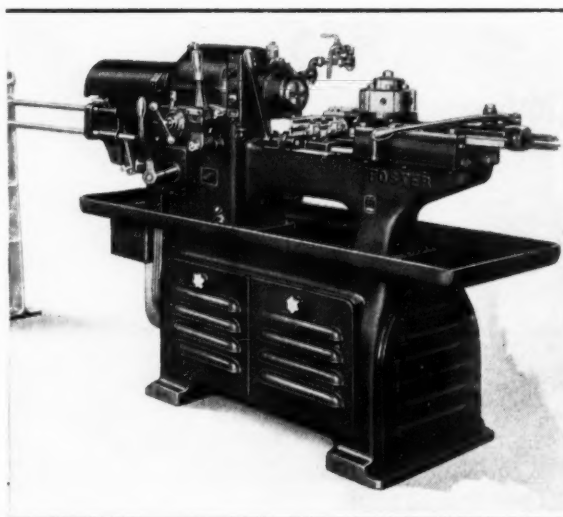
Screw Machine which Provides the High Spindle Speeds Demanded Today
